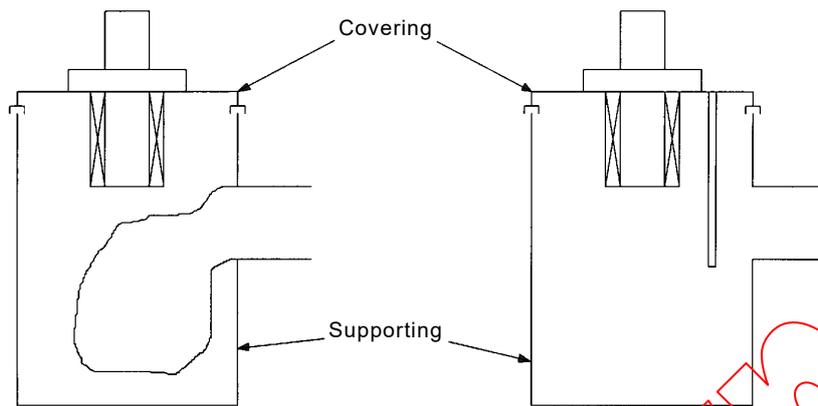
Non-metallic parts enclosing collected combustible dust
